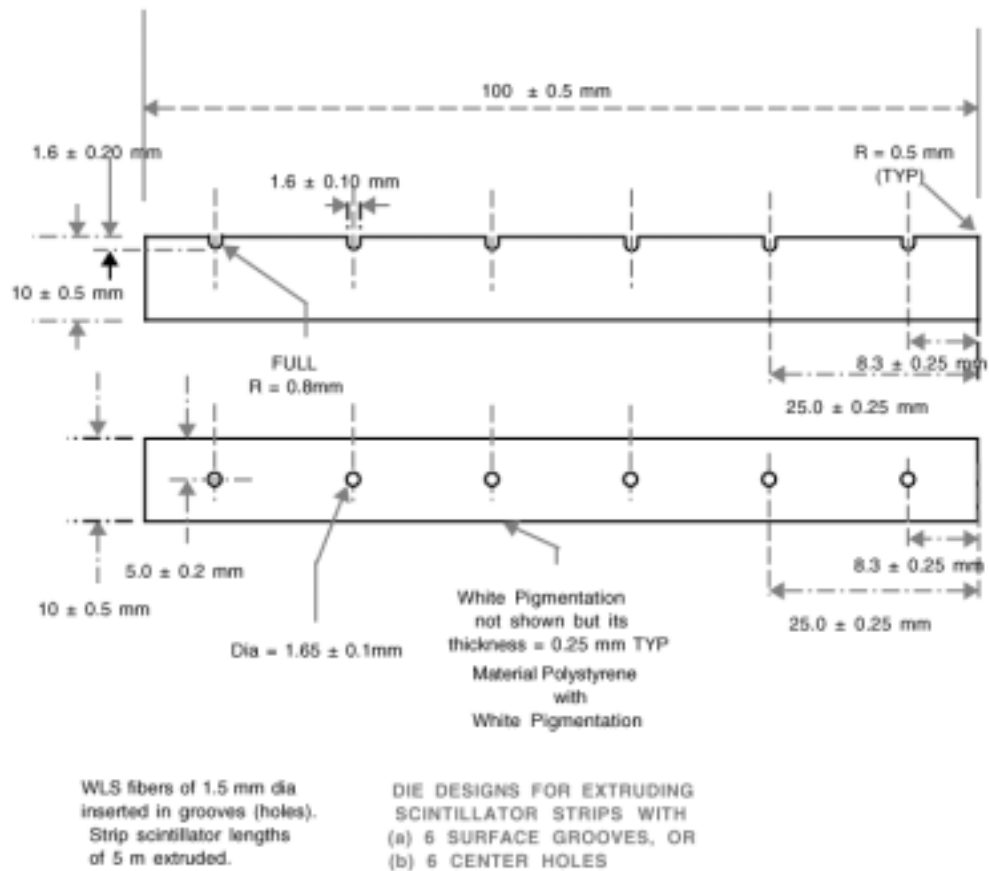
Cross sectional view of two die design for producing extruded scintillator bars with imprinted grooves or holes
